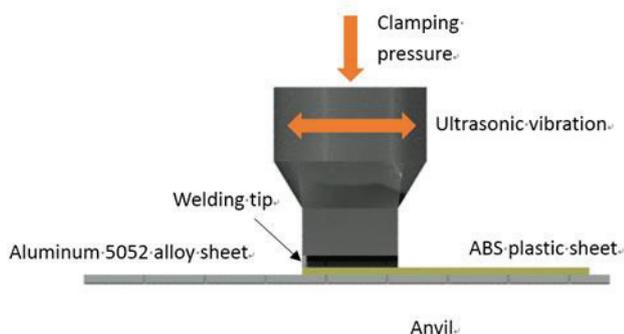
Ultrasonic welding of two overlapping test pieces
